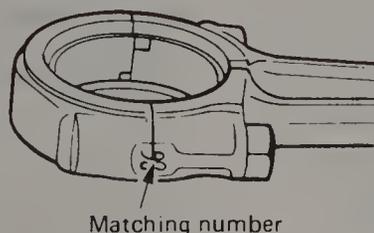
The connecting rods may be marked with a number (which will help to match the rods and caps correctly) (Sec 25)
